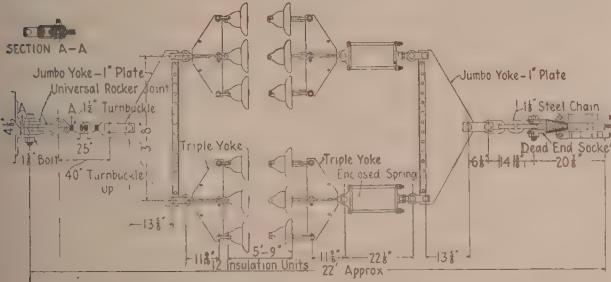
ASSEMBLY OF CONDUCTOR INSULATING SUPPORTS FOR ANCHOR TOWER
